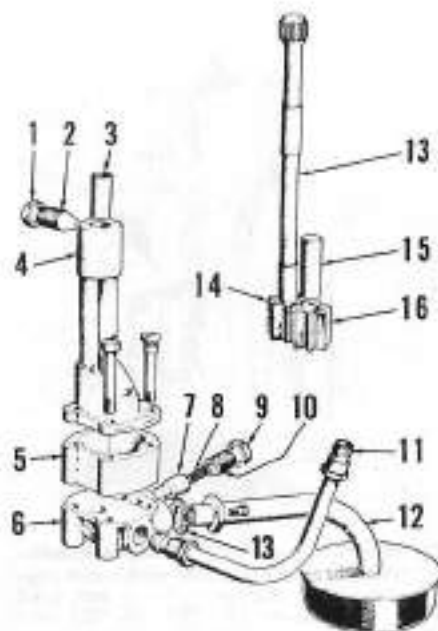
Exploded view of oil pump for three-cylinder diesel engine. Gasoline engine oil pump is similar except for difference in drive shaft (13). Late diesel drive shaft has $\frac{1}{4}$ -inch hole in top end to carry fuel injection pump drive shaft thrust spring.
